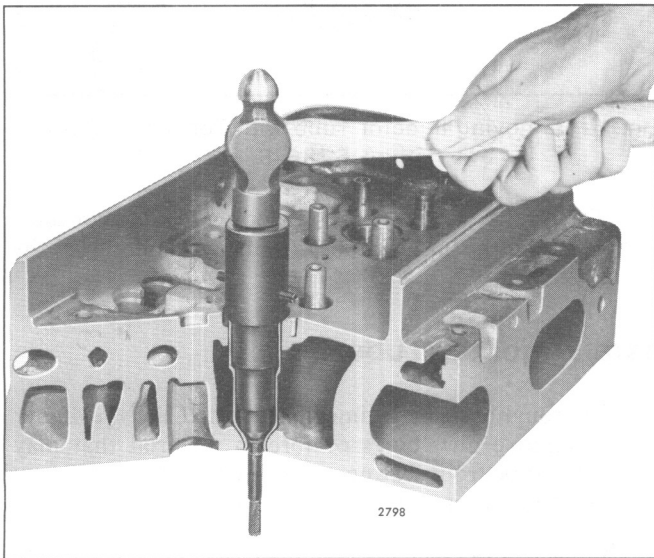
Installing Injector Tube with Tools J 5286-4C and J 5286-5
